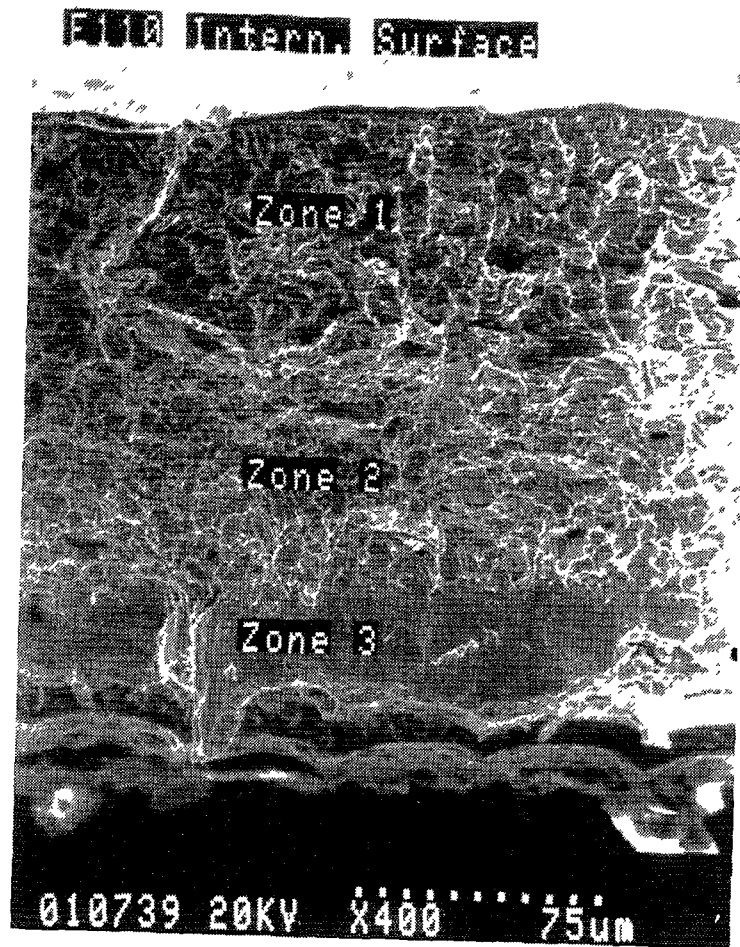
Fracture surface in penetrating crack area: zone 1 - essentially transgranular fracture in iodine environment; zone 2 - ductile fracture; zone 3 - ultimate fracture
